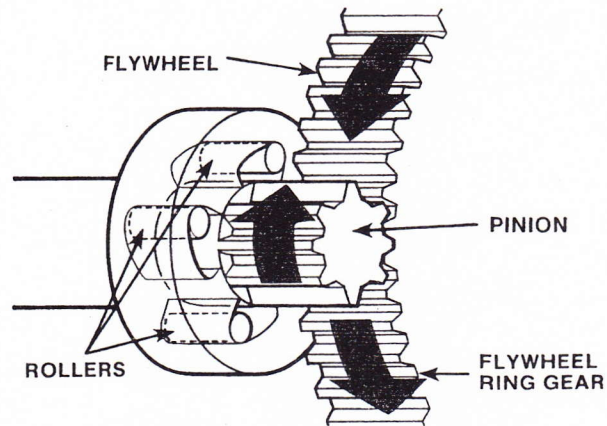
When the engine starts, the flywheel spins the pinion gear faster, which releases the rollers from the wedge.
